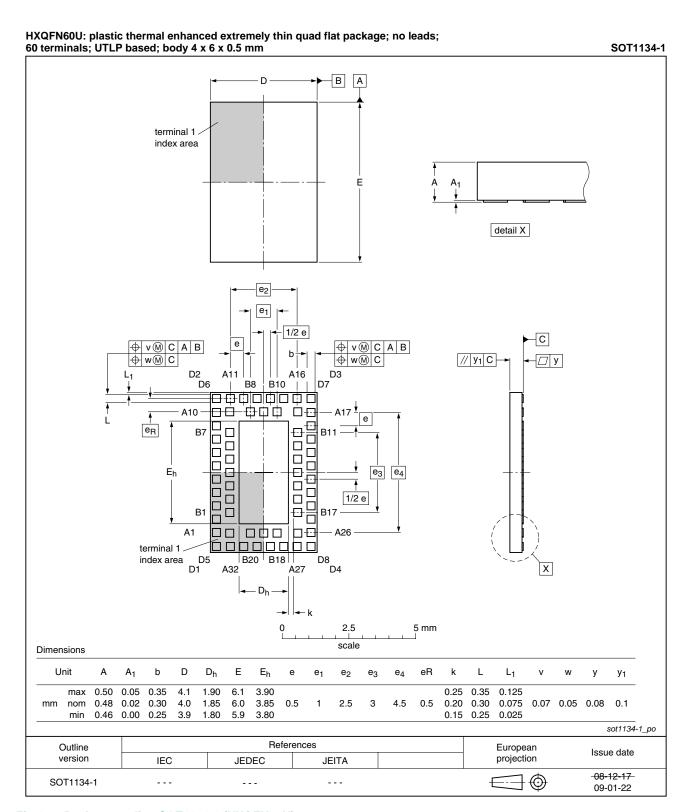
Package outline SOT1134-1 (HXQFN60U)
